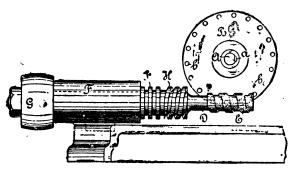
Positive Driving Mechanism. Goolden's Governor (Top View).
